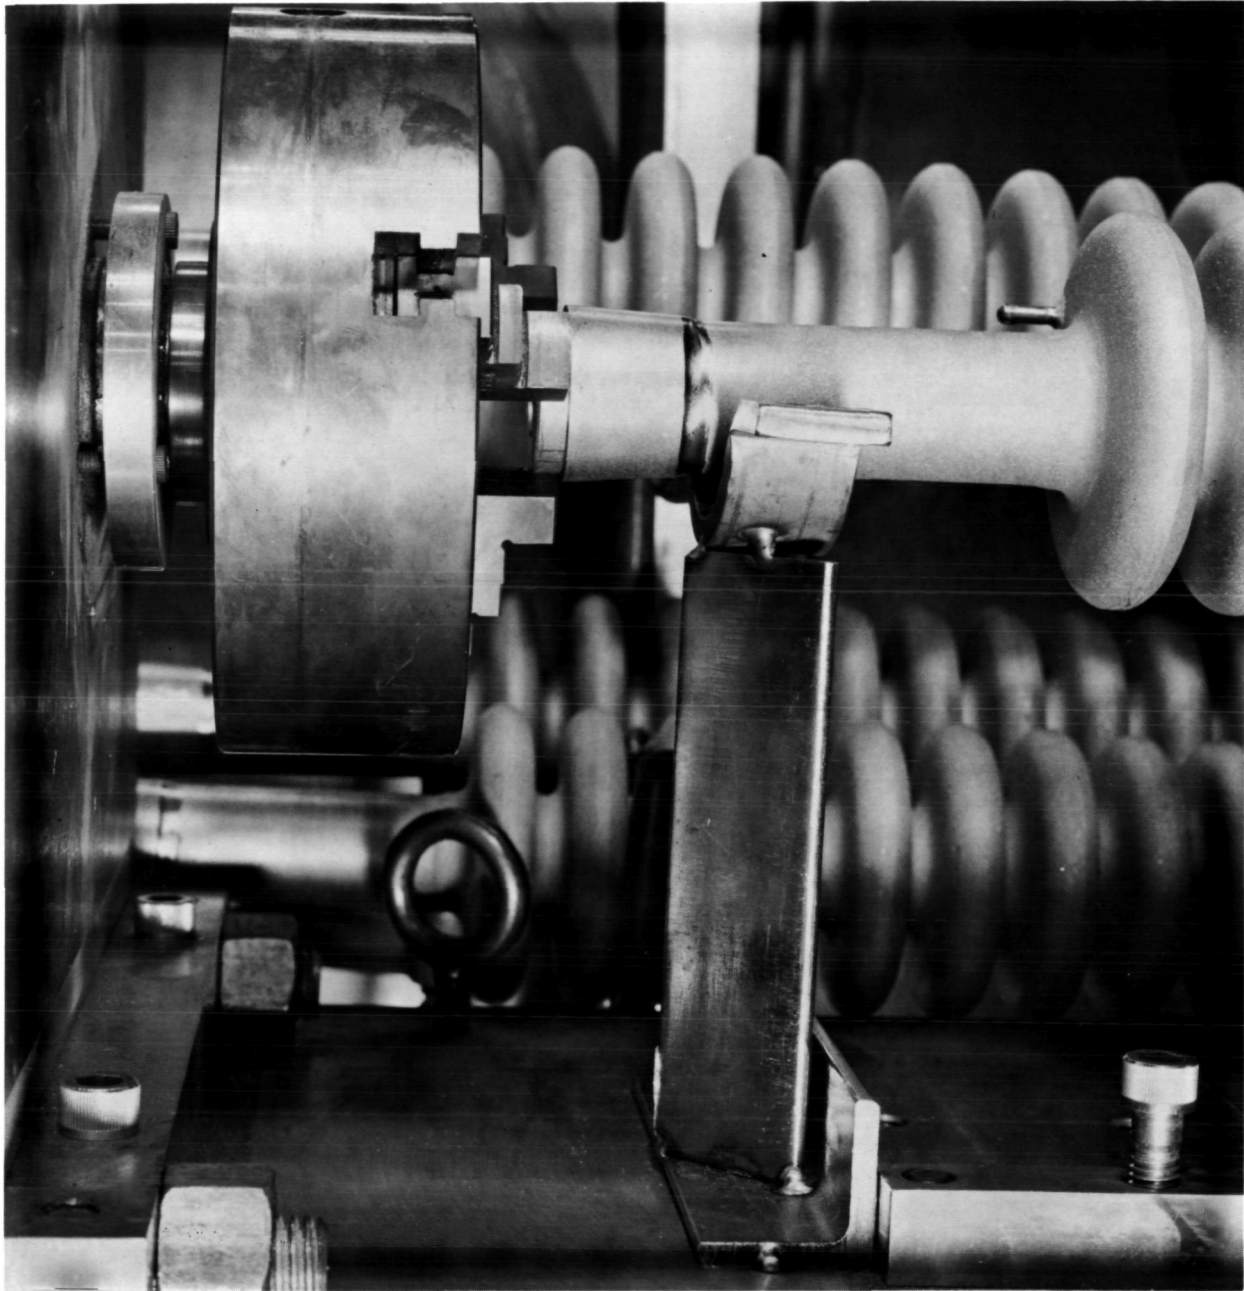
Close-Up of Typical Automatic Weld Inlet Ferrule-to-Tube.
